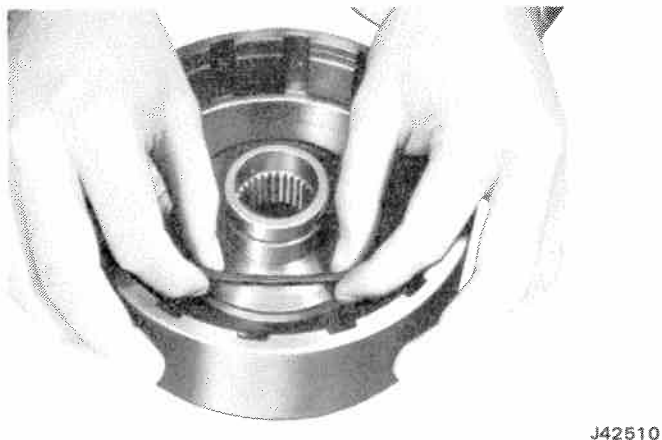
Installing Center Seal in Direct Clutch Housing
